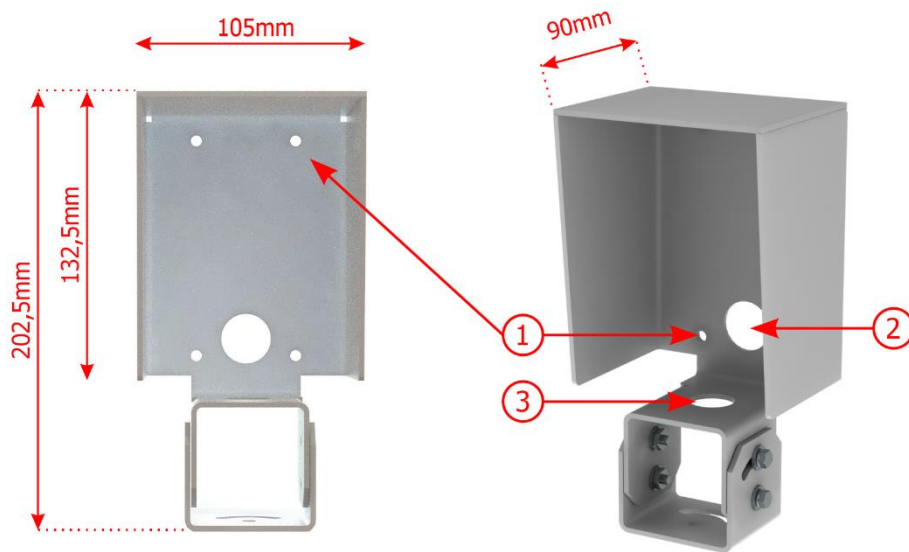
ITSLUX Bracket: 1) 4 Hole for ITSLUX device attachment, 2) Opening for valve clearance, 3) Cable passage and cable press
